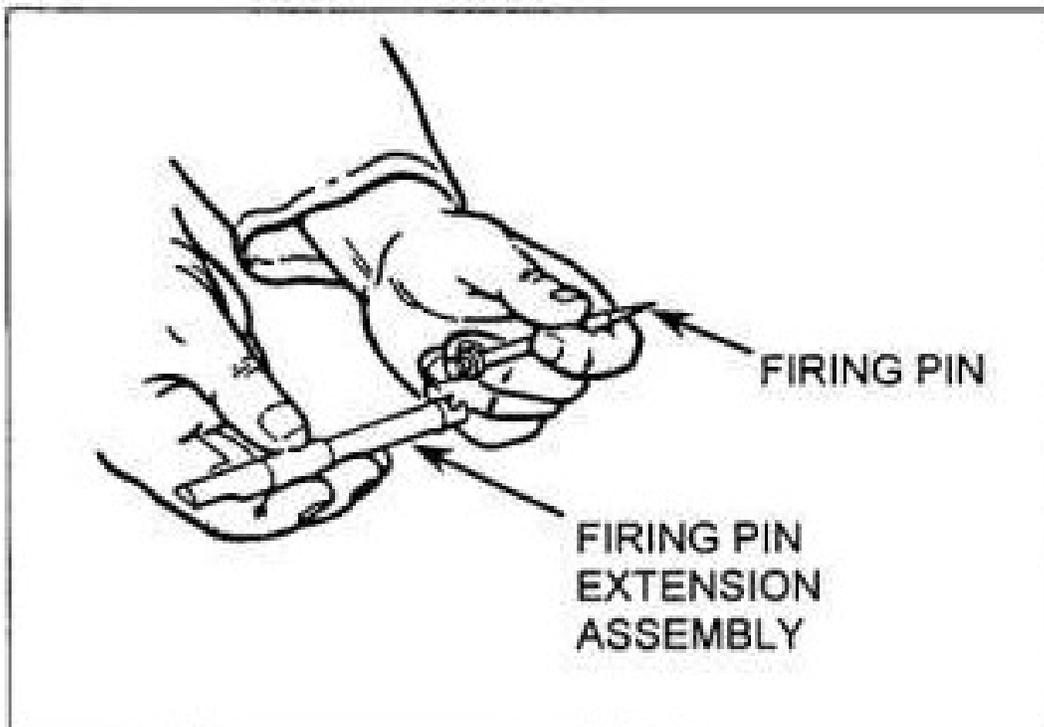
ST-1025_30 (Attachment of the firing pin to the firing pin extension assembly)
